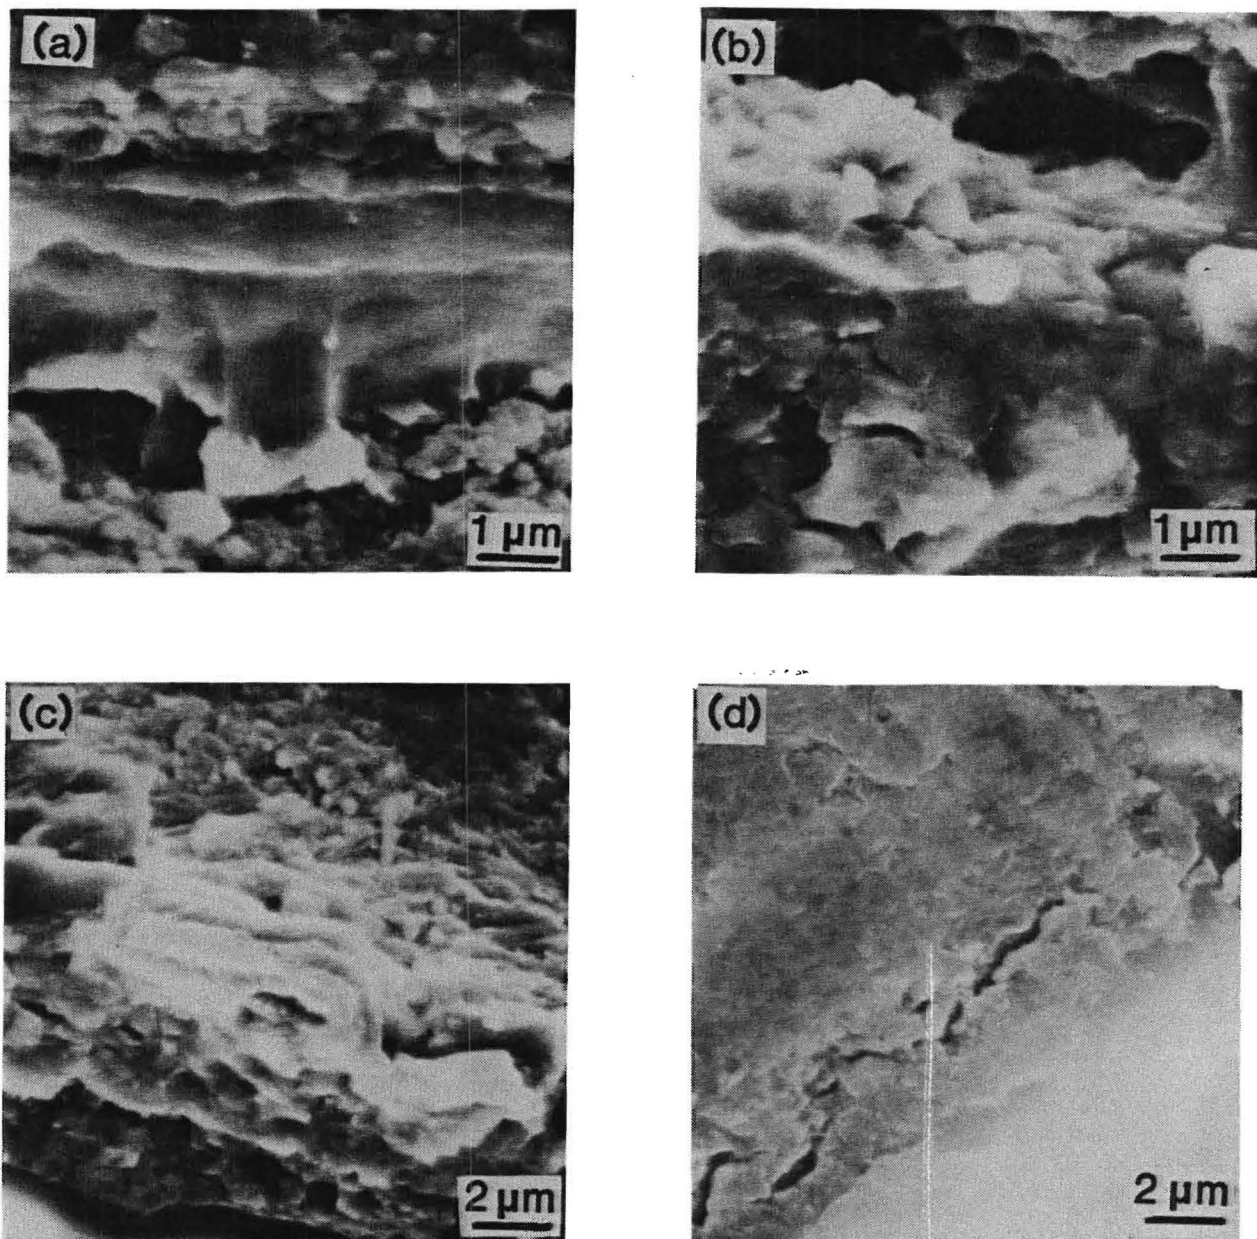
SEM fractographs showing features of the aluminum bonded wire fatigued in laboratory air environment while carrying 75 mA of d.c. current.
